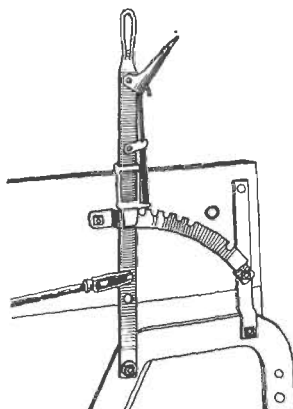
Showing the feed lever in high speed. Pushing lever ahead to last notch throws machine out of gear.
